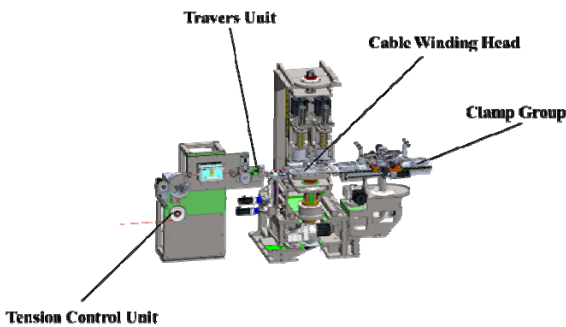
Cable Packaging Machine Sections Capable of Securing the Cable End Without Requiring Any Auxiliary Materials
